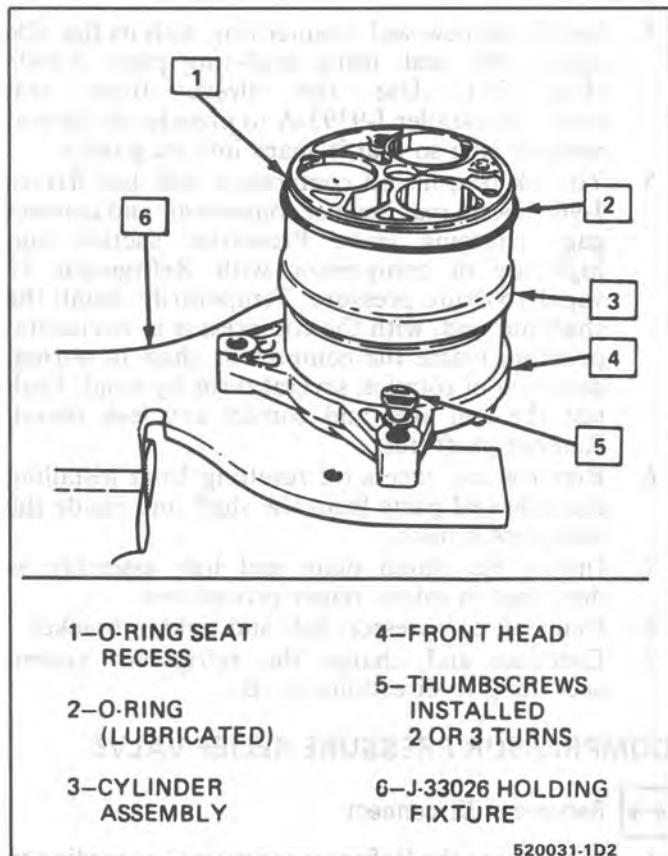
O-Ring Installation On Rear Cylinder O-Ring Seat Recess
